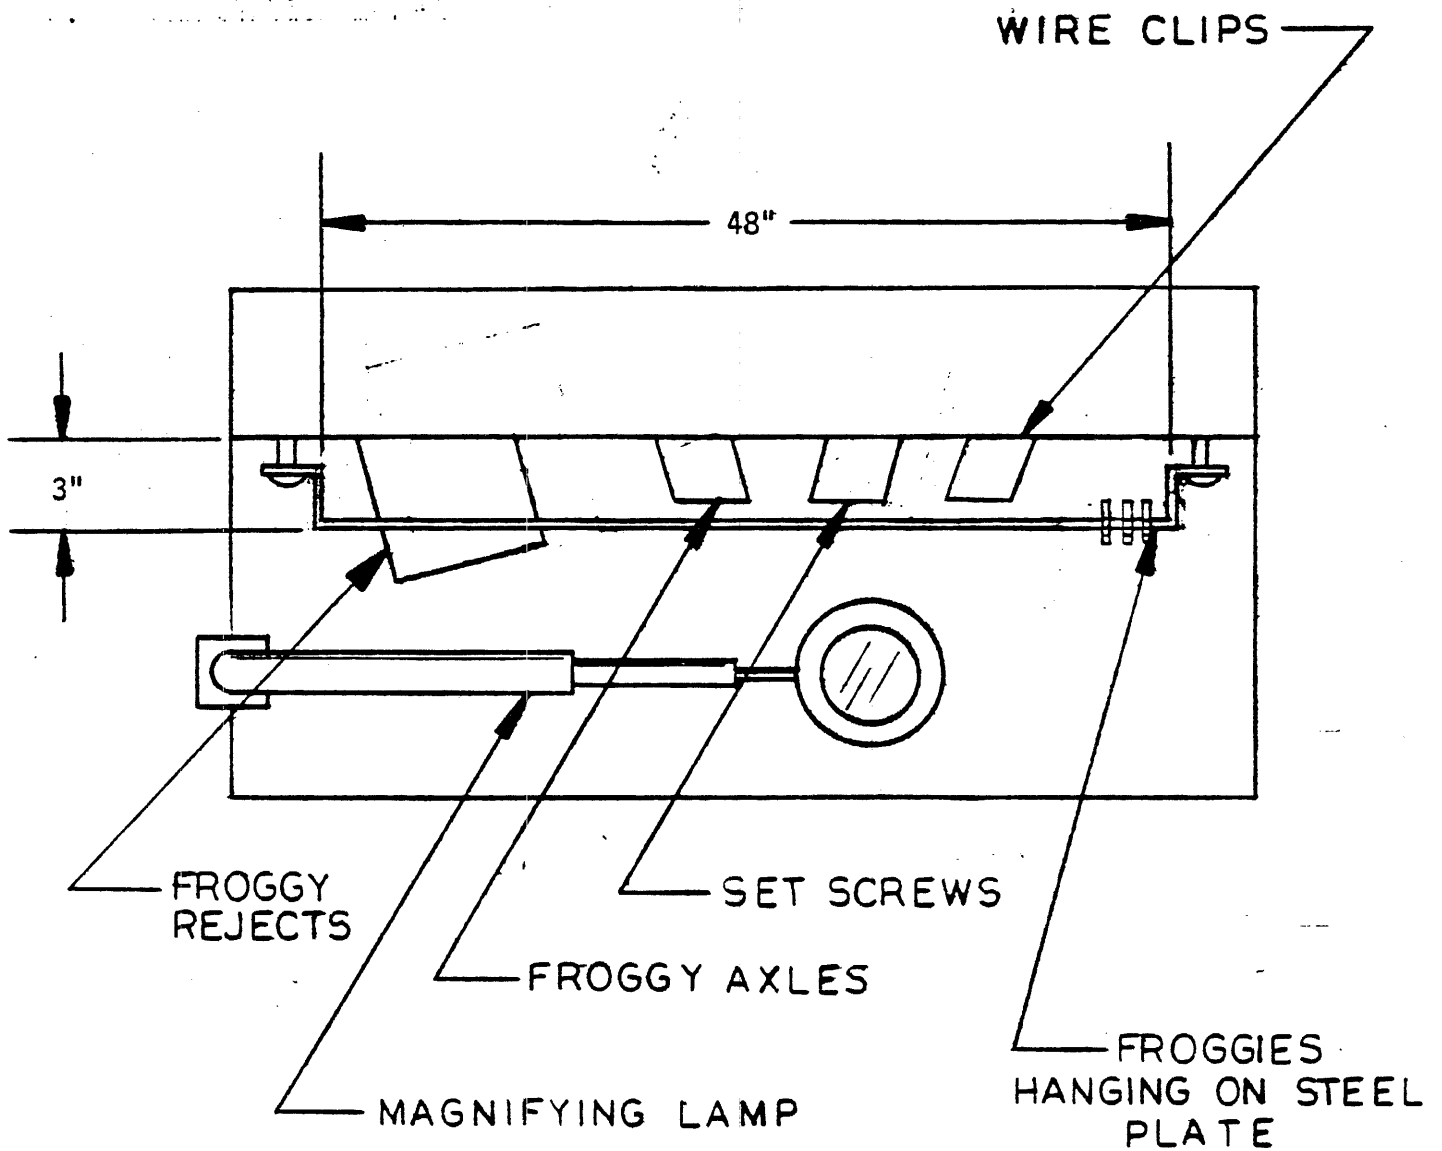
, THE LAYOUT AT ASSEMBLY STATION #3B.
